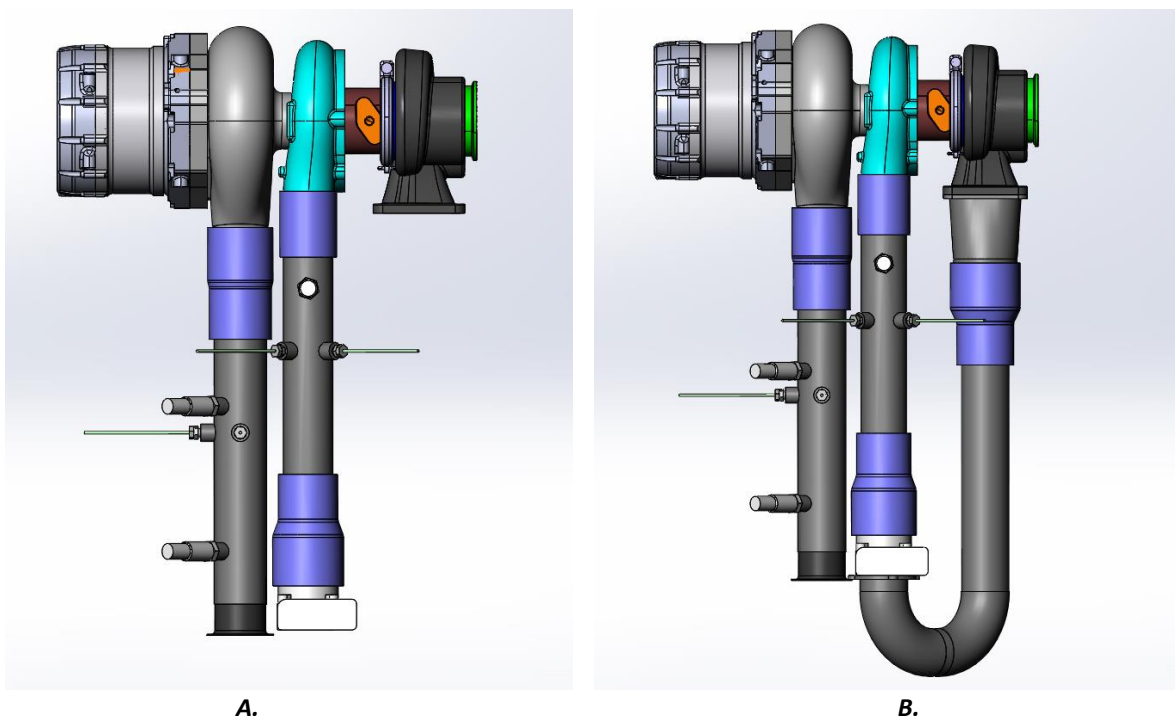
A VALIDATION CONFIGURATION WITH ONLY THE ELECTRIC MOTOR. IN THE CAD-FILE, THE TURBOCHARGER WAS A SINGLE PART. THEREFORE THE TURBINE HOUSING IS NOT REMOVED IN THE CAD-SOFTWARE. IN THIS CONFIGURATION HOWEVER THE TURBINE HOUSING WILL AND CAN BE REMOVED FROM THE TURBOCHARGER.. B VALIDATION CONFIGURATION WITH ELECTRIC MOTOR AND TURBINE. IT IS EXPECTED THAT WITH THE SECOND CONFIGURATION (B) A LARGER RANGE CAN BE MEASURED IN THE COMPRESSOR MAP THAN WITH THE FIRST CONFIGURATION (A). THE EXPECTED DIFFERENCE BETWEEN THE TWO COMPRESSOR MAPS CAN BE SEEN LATER IN E.G. FIGURE 3.9.
